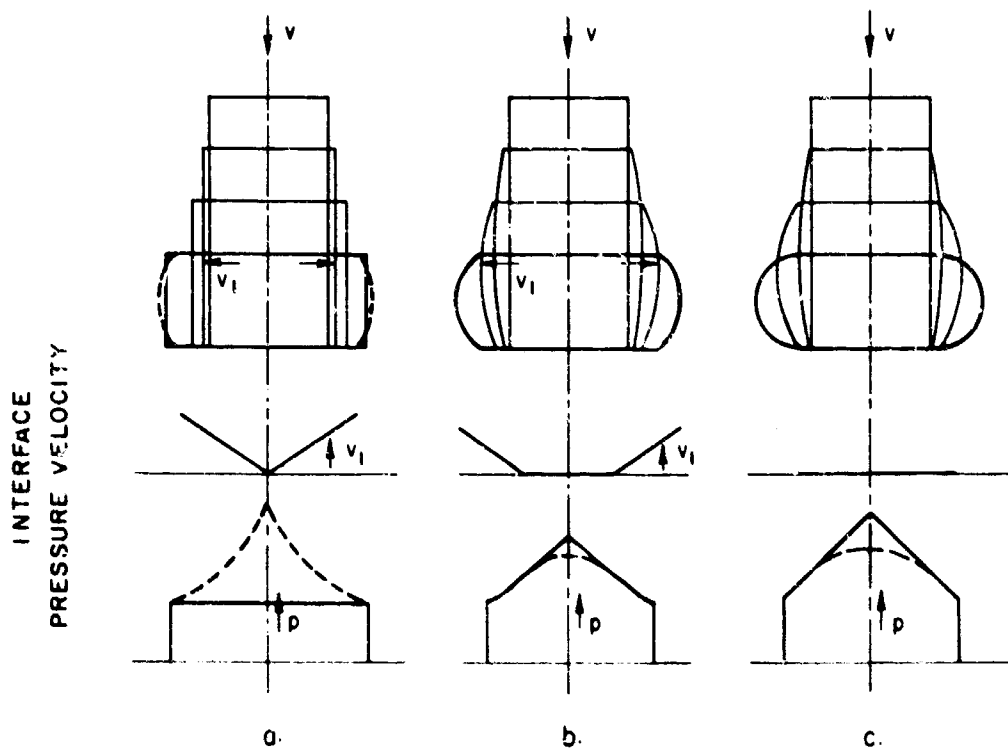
Interface sliding and the friction hill in upsetting a cylindrical workpiece with (a) complete sliding, (b) partial sticking, and (c) full sticking [13].
